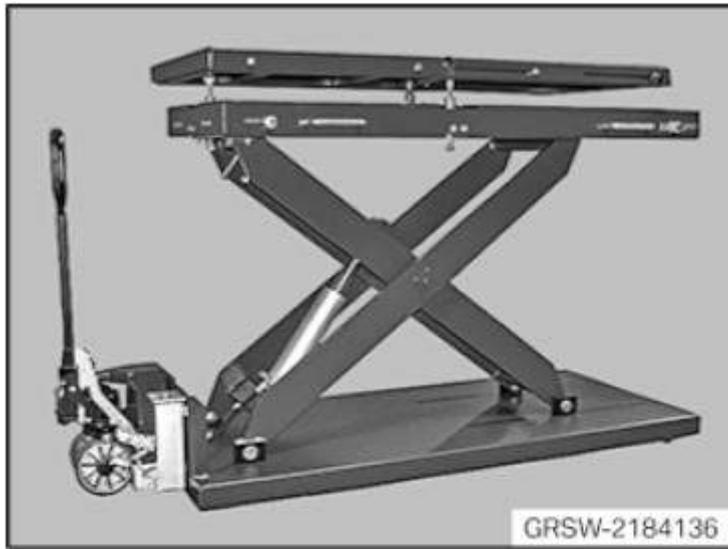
Identifying Mobile Equipment Table Lift (2184136)
